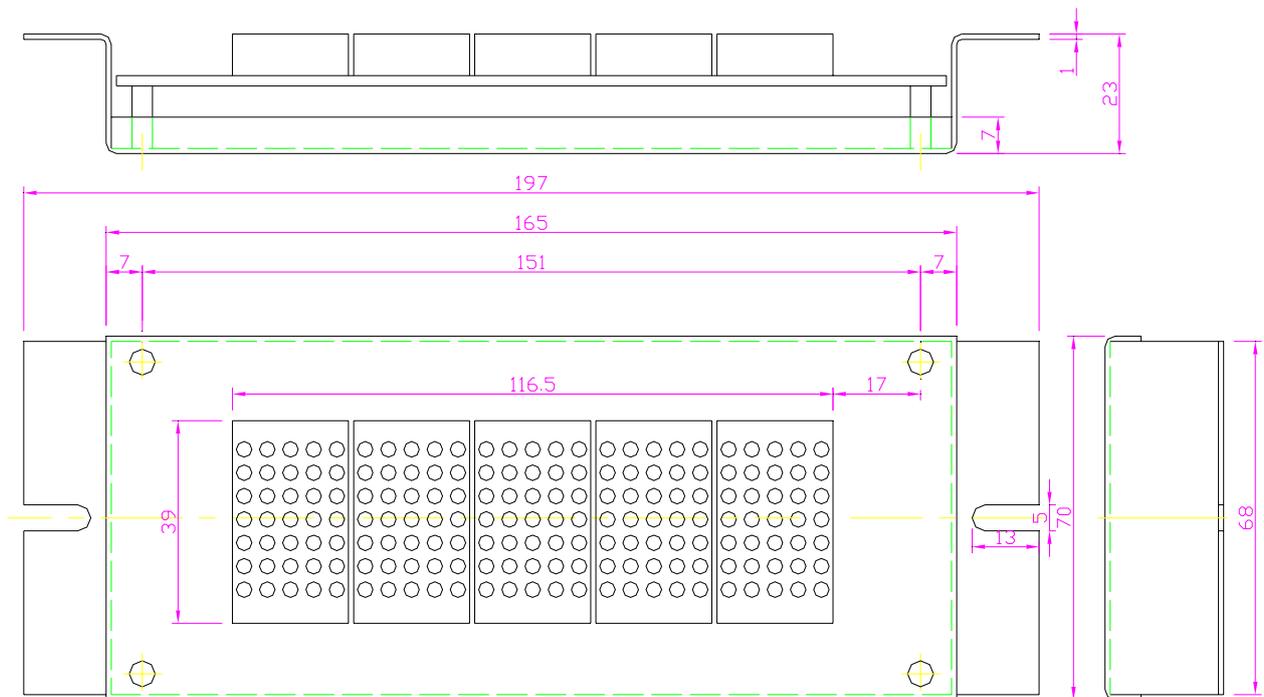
(B) Mounting Dimensions of SM-04-HRC
